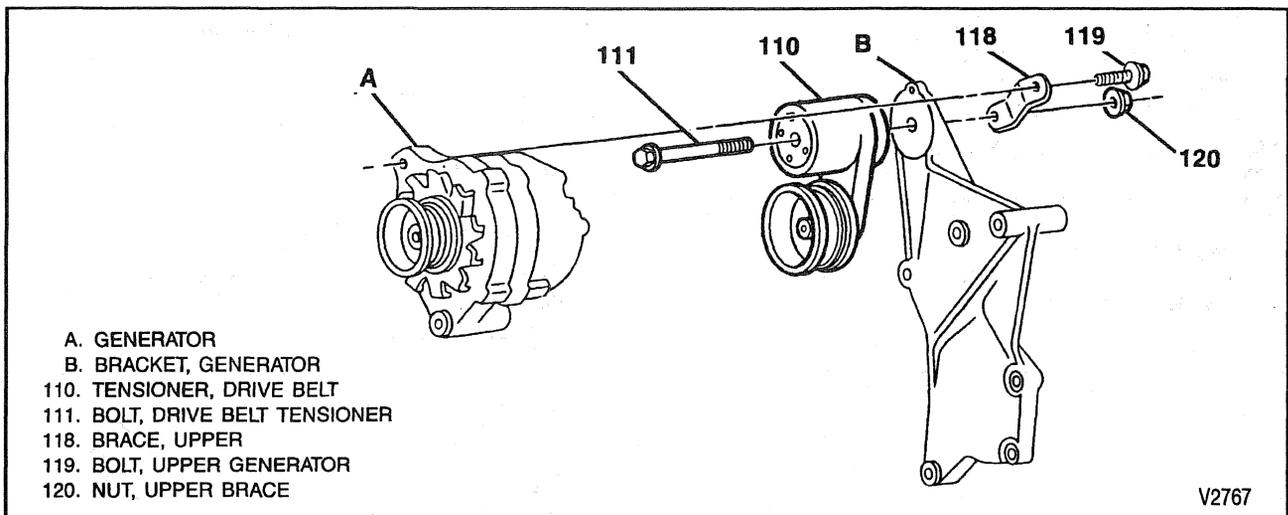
Belt Tensioner Assembly (Diesel Engines)
